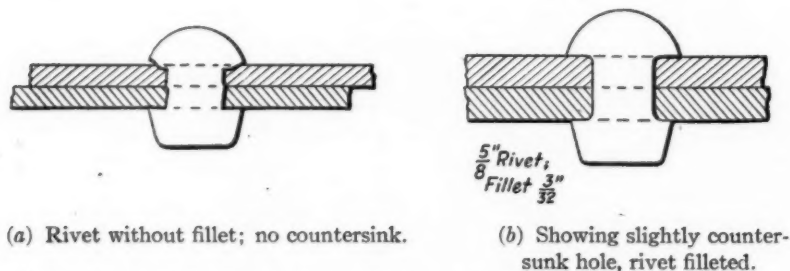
Rivet Driven for Test Purposes, $\frac{5}{8}$ in. in Diameter, $\frac{11}{16}$ -in. Hole.
